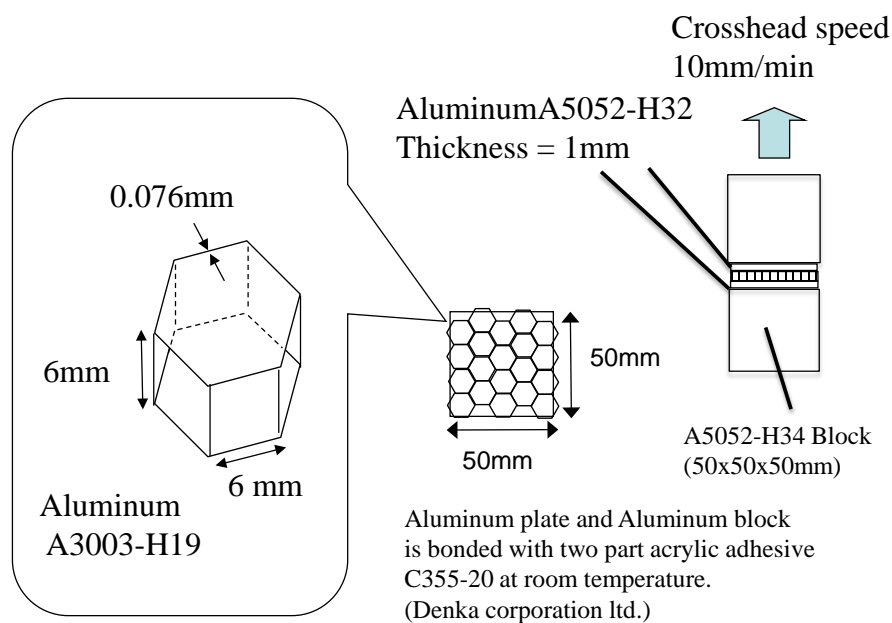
Shape and dimensions of honeycomb and specimens for flat-wise test.
